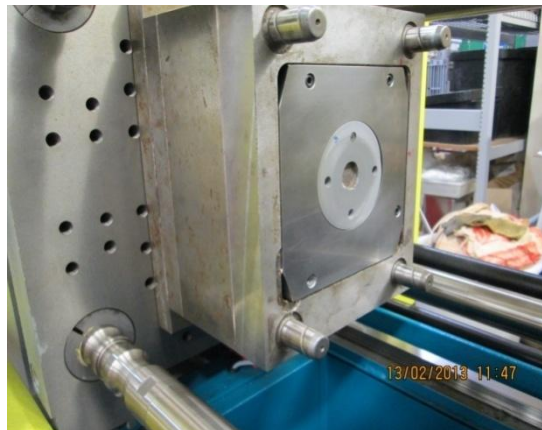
The mould with cavity insert manufactured by the proposed rapid tooling approach is installed on the BOY 35A injection moulding machine.
